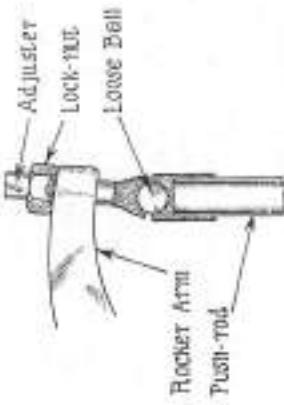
VALVE CLEARANCE ADJUSTMENT PROVIDED ON MOST O.H.V. ENGINES
